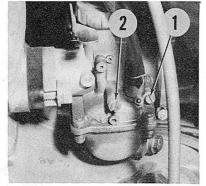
View of carburetor adjustments common to late model 250 and 360cc units.
